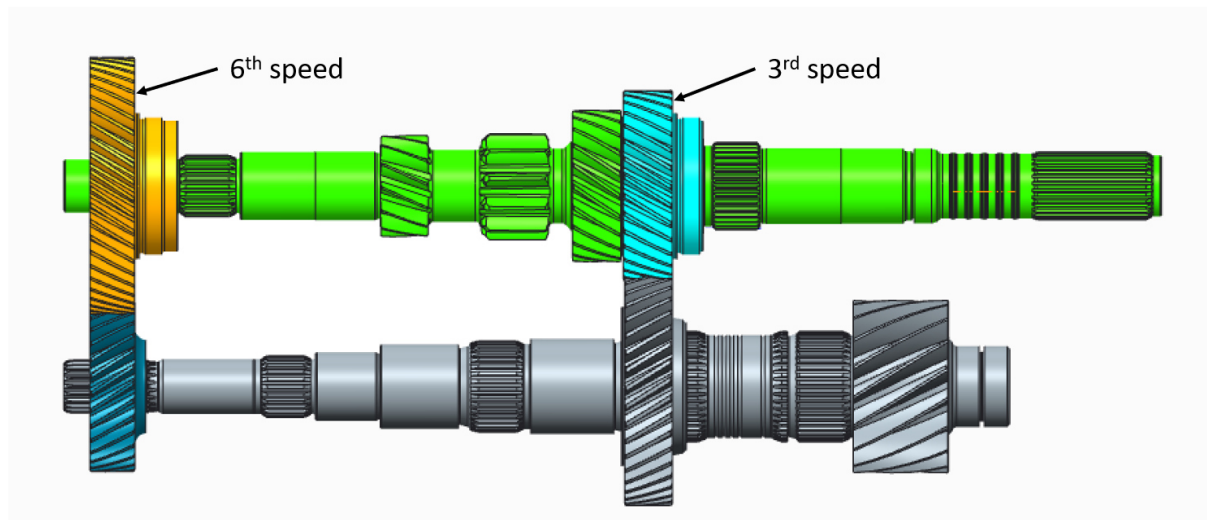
Two selected gearsets to be replaced with the gearsets made from the PM material instead of standard wrought steel.
